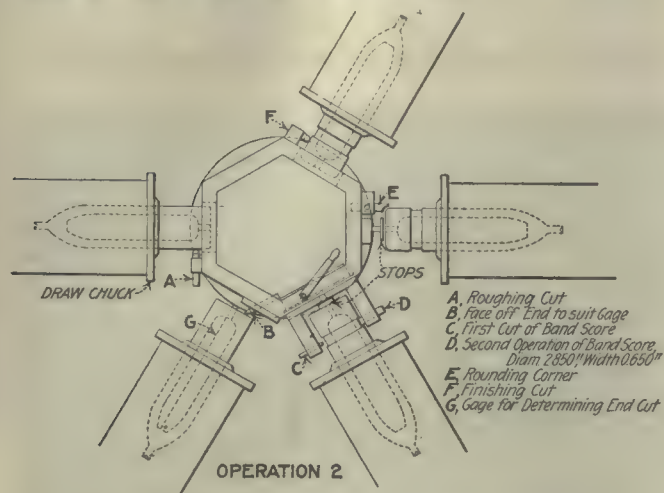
TOOL LAYOUT FOR OPERATION 2
